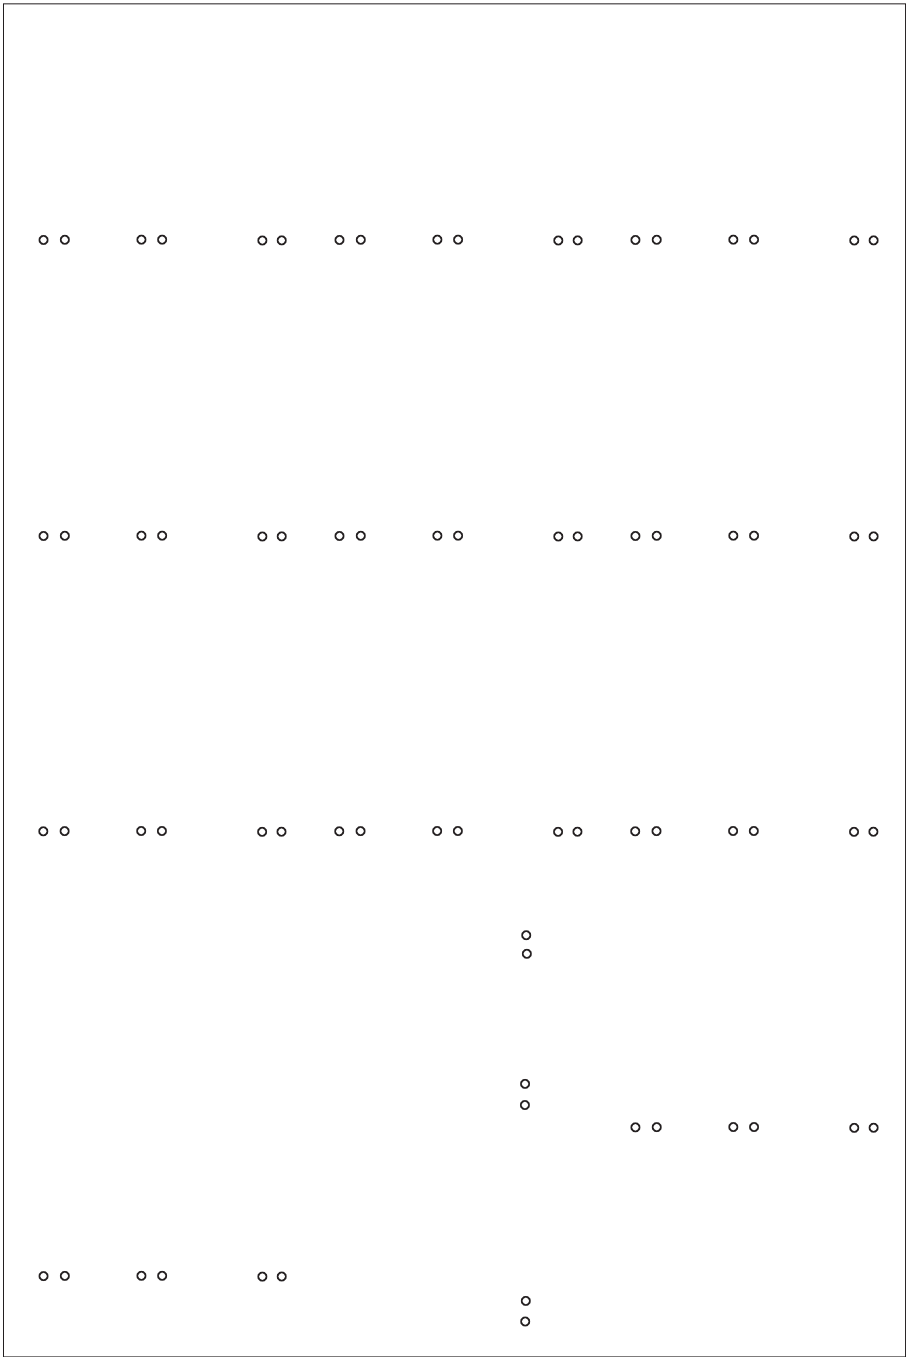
Holes specification of the drawing supplied to the manufacturer.
